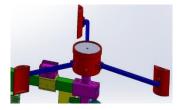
(a) This is an assembled and complete wind speed sensor that was designed and assembled using Solid Works 2017.
